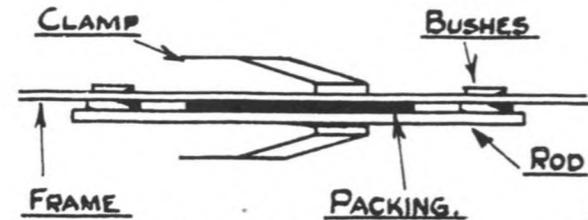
Coupling-rod blank clamped to frame for spotting through.
